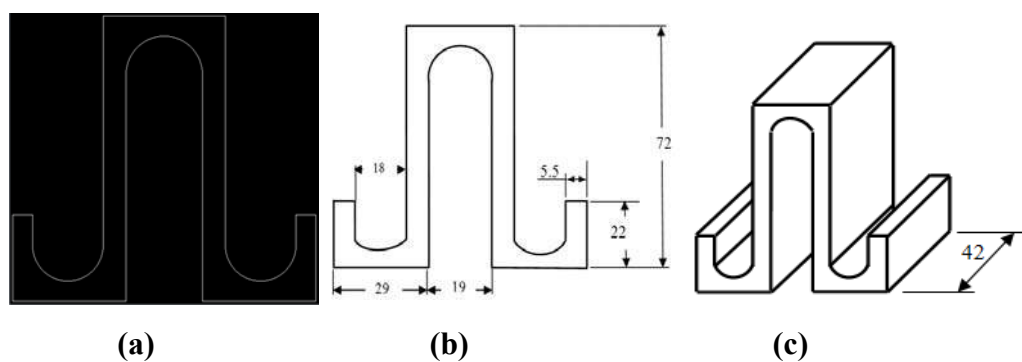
36. (a) Diagram represents the dimensions (in mm) of the part used for preparing the CNC milling machine program; (b) sketch illustrates the cross-section of the final part after finishing processes; (c) Sketch shows the isometric view of the part.
